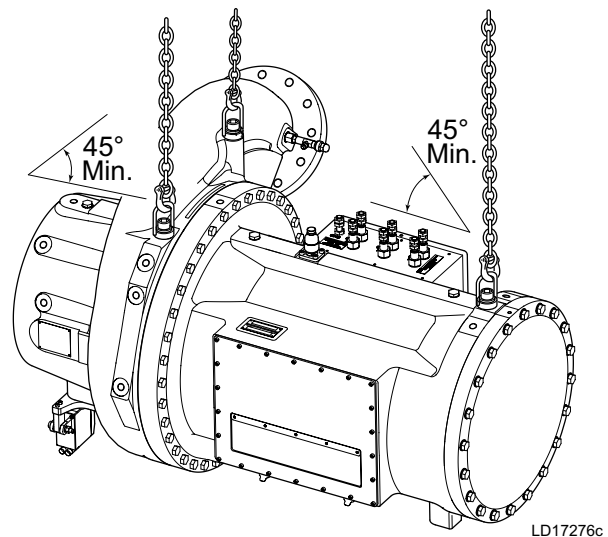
DRIVELINE RIGGING 3 CHAINS
